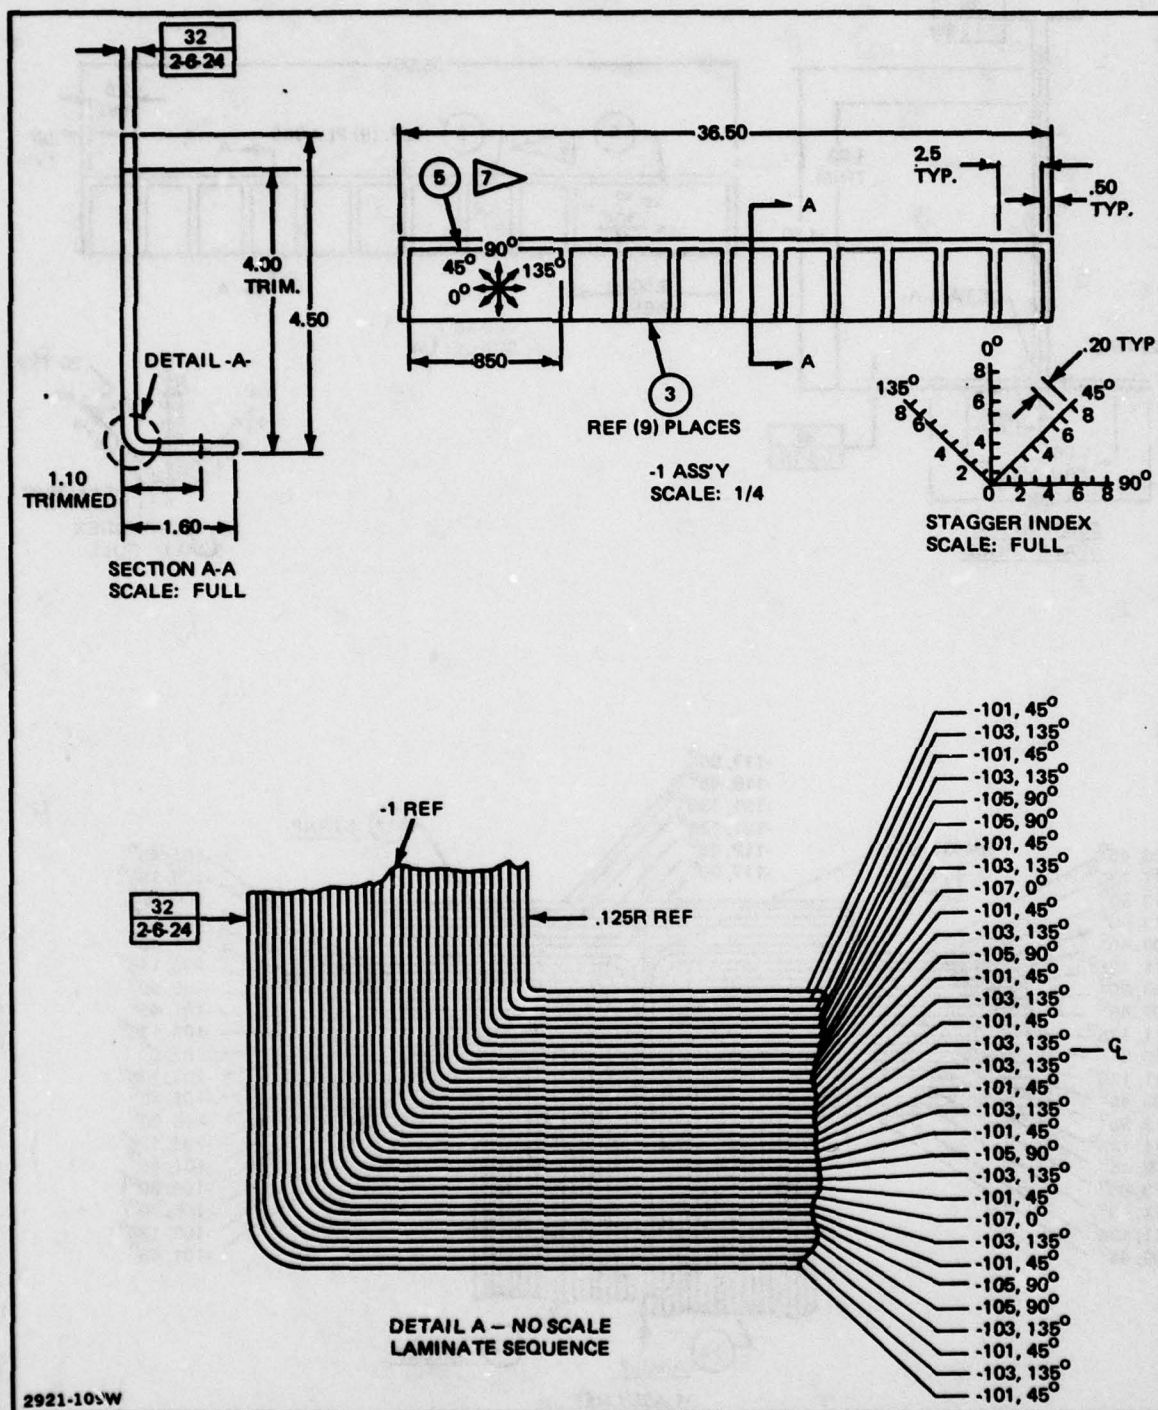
Angle Cap Specimen Fabrication (Mechanically Attached)
